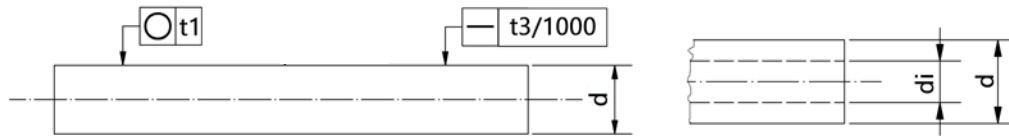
Tolerances and dimensions from precision shafts
